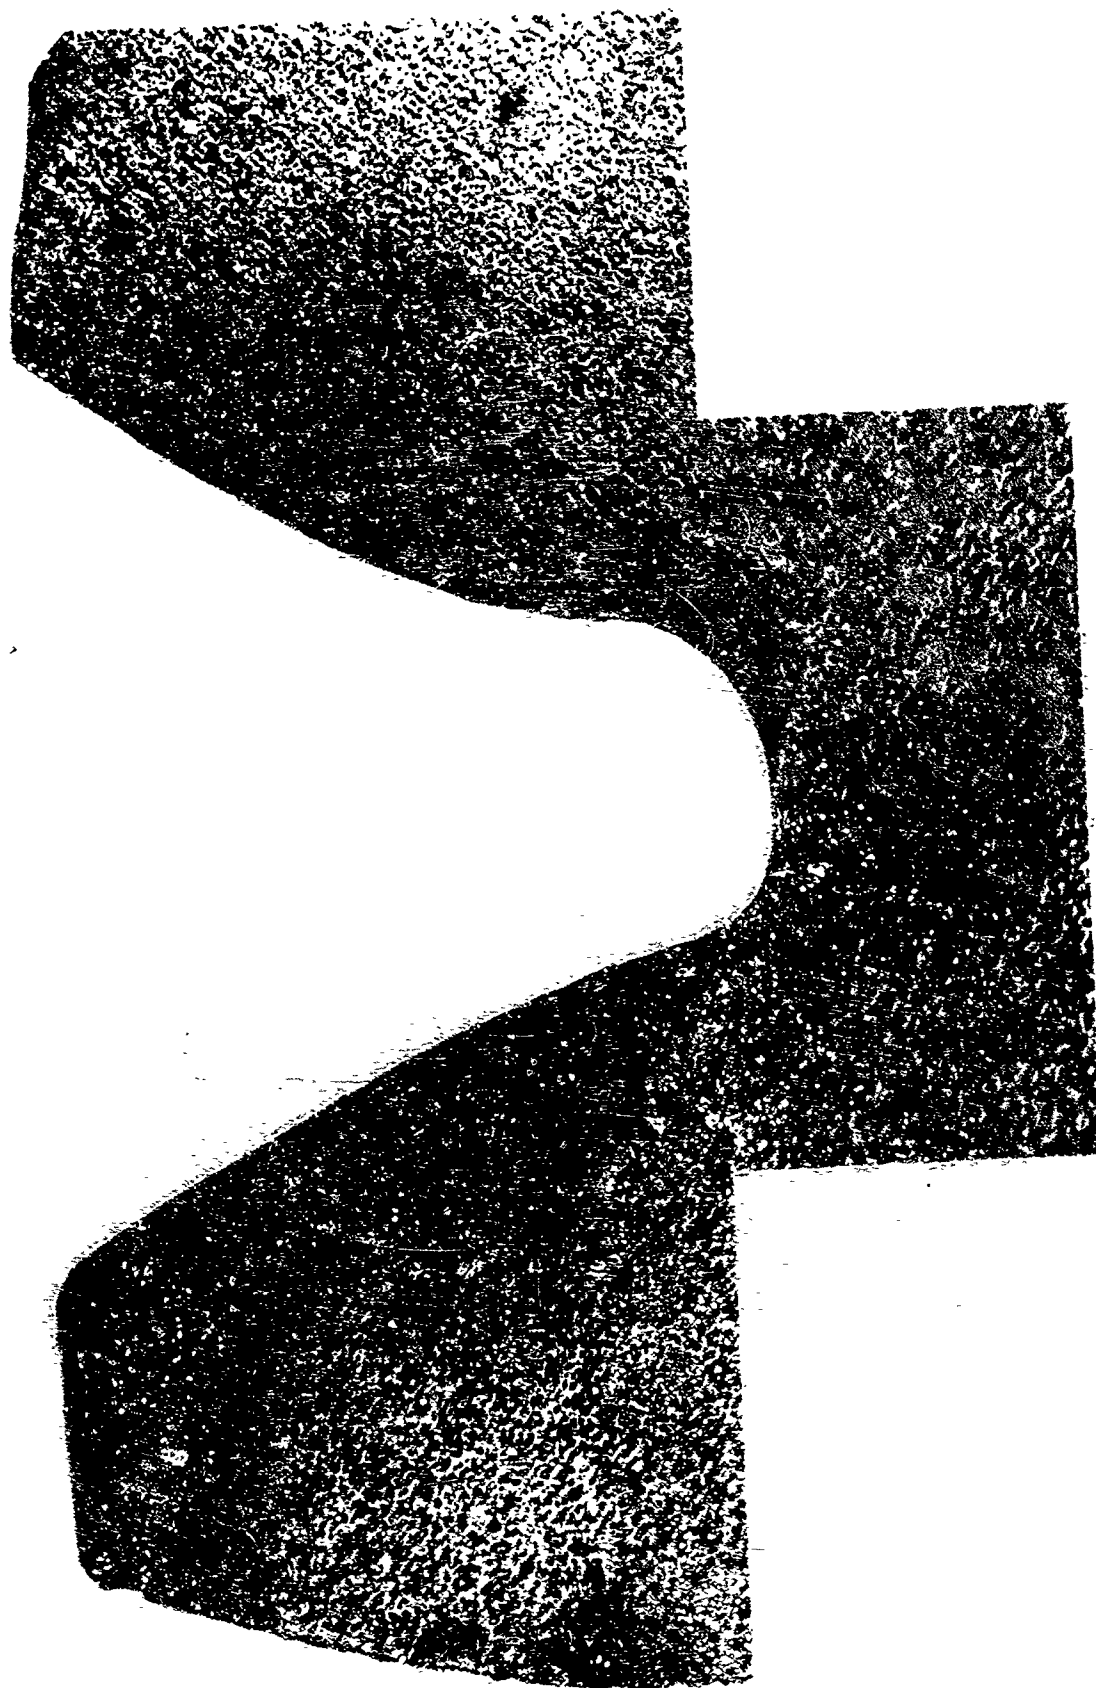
Flow Around the Tooth Root and Flank of the Spiral Bevel Pinion Forging
